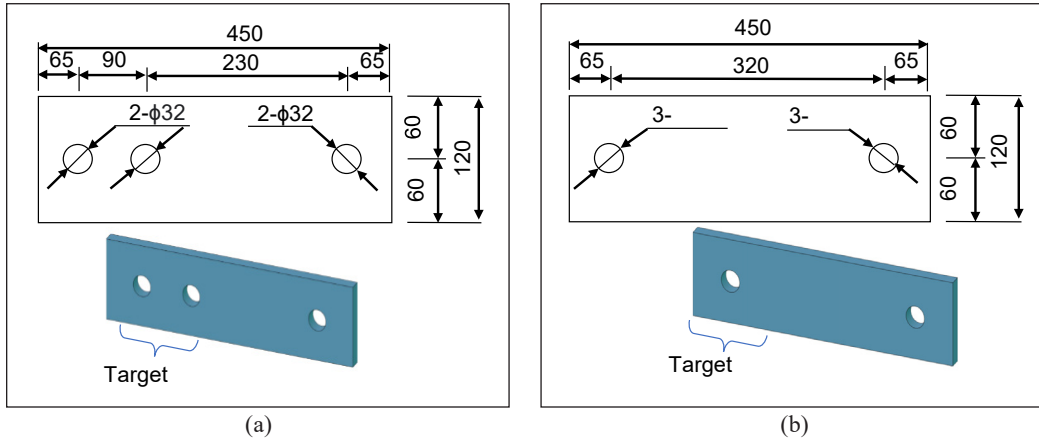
Specimen type and dimension: (a) Specimen with two holes; and (b) Specimen with one hole (dimensions in mm)
